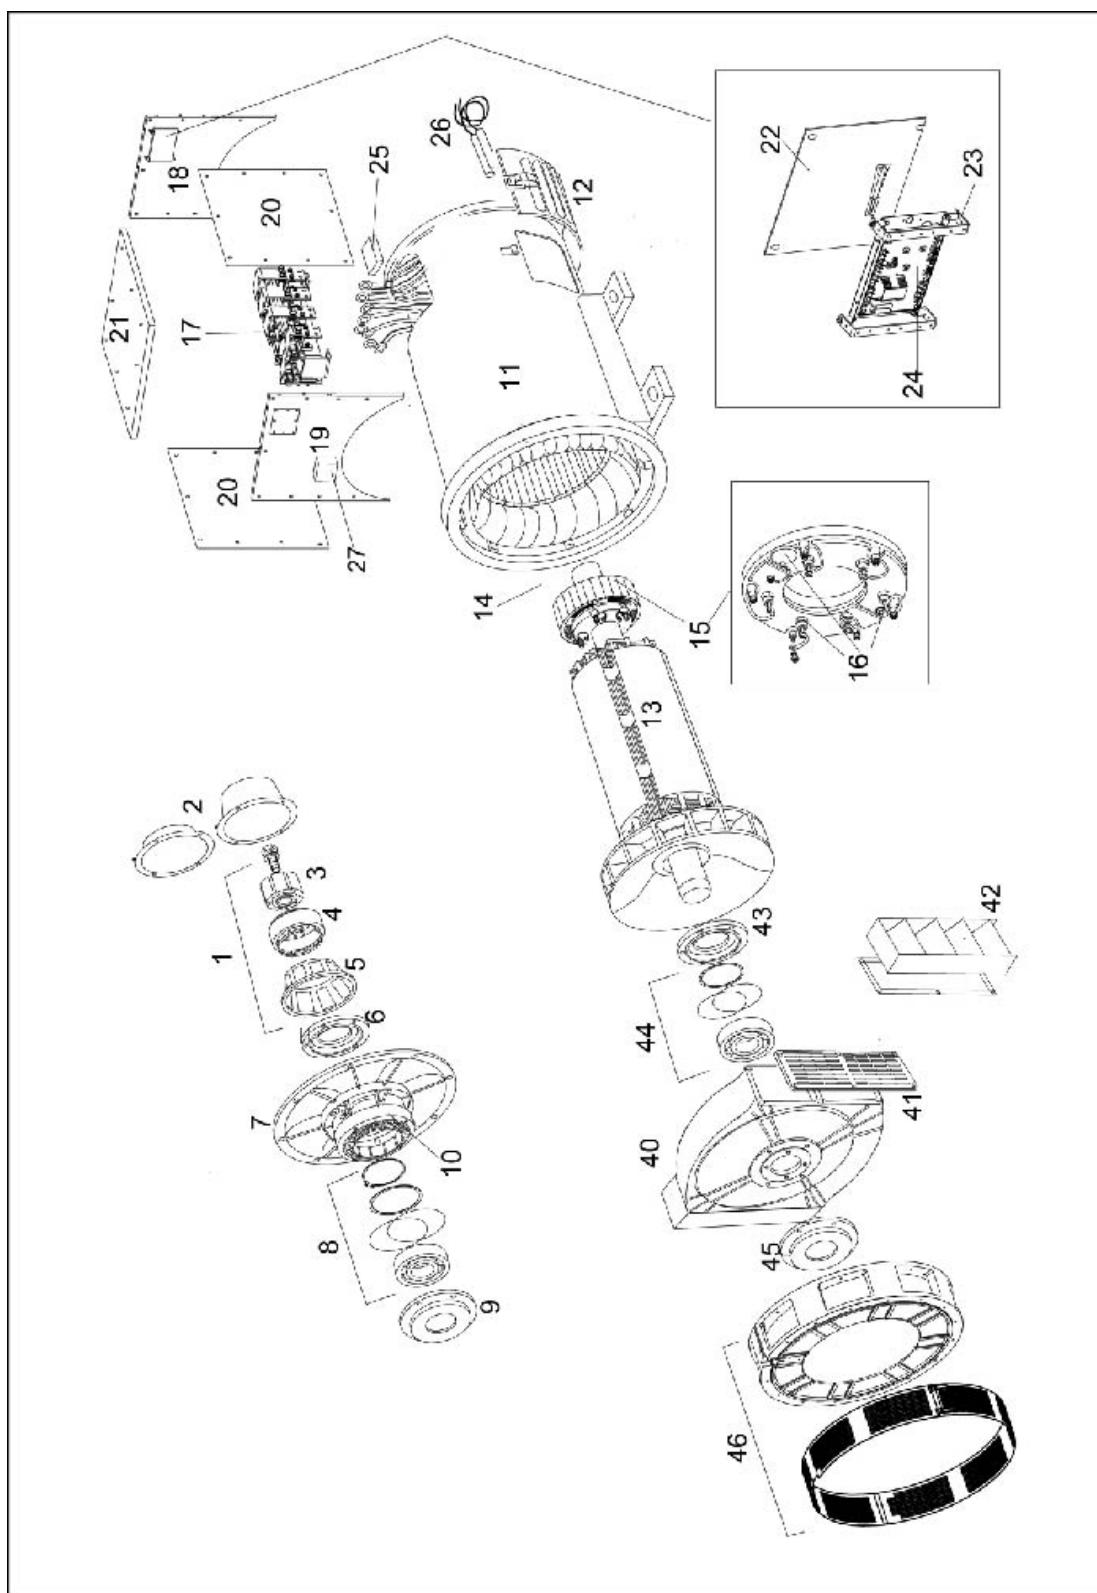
HC5 TWO BEARING ALTERNATOR
